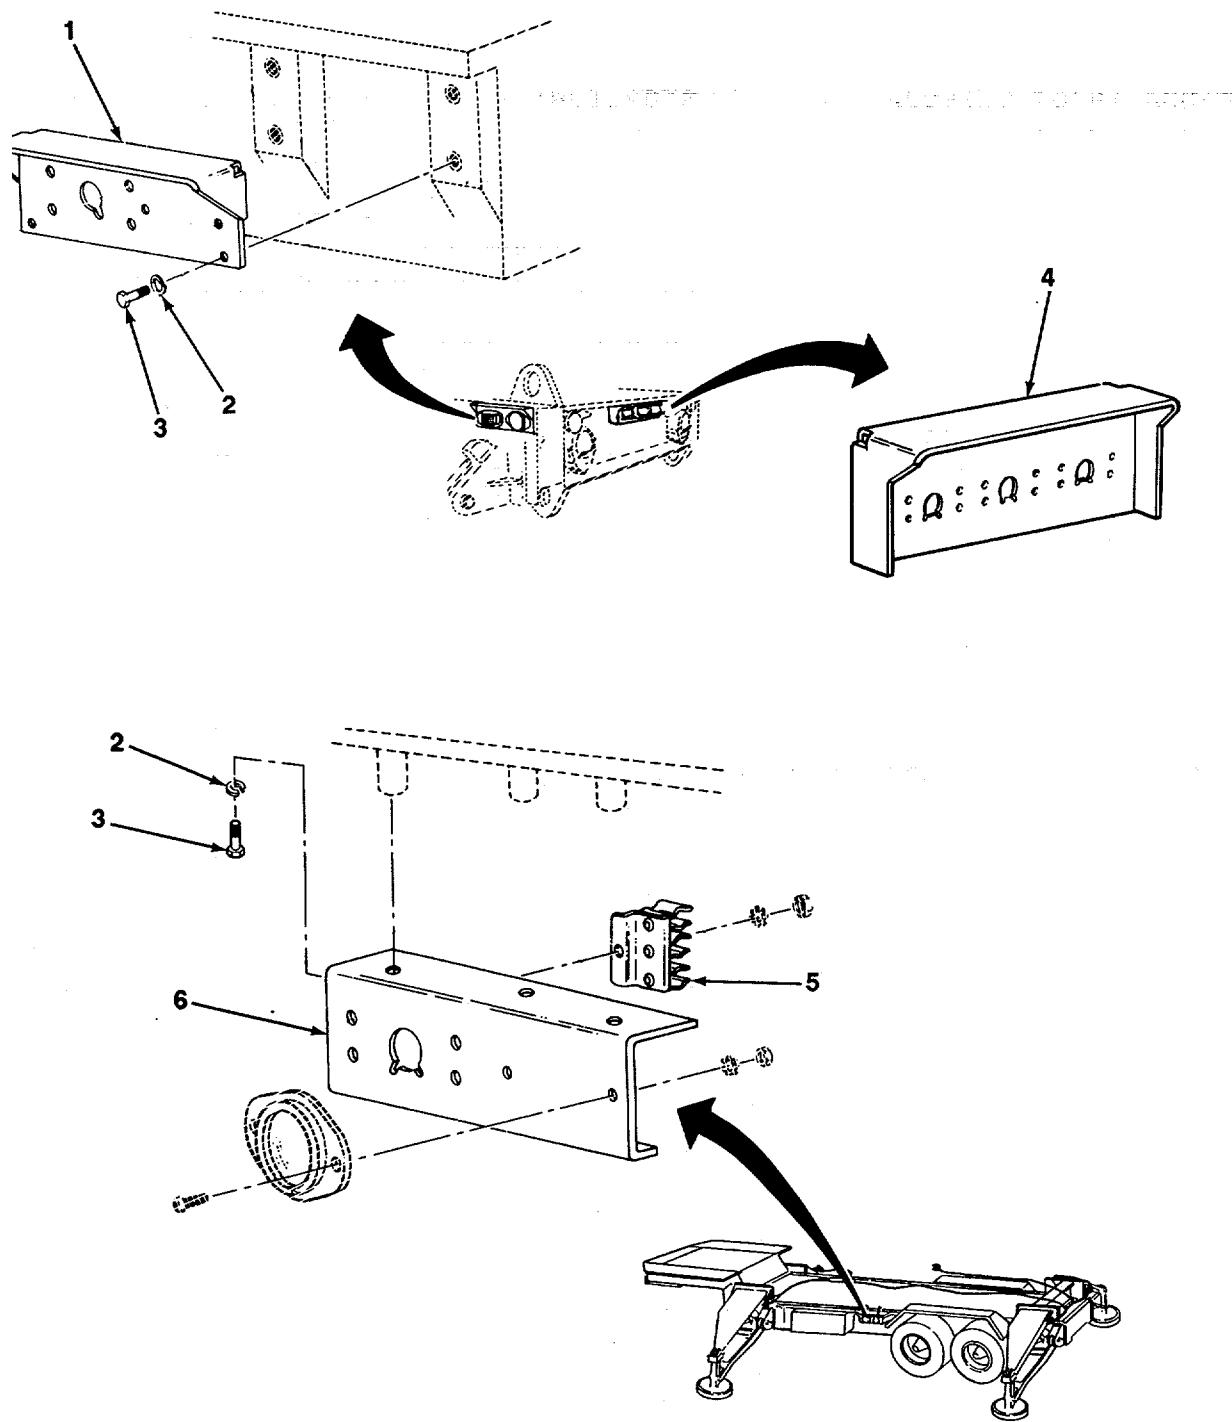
CLEARANCE LIGHT MOUNTING HARDWARE
